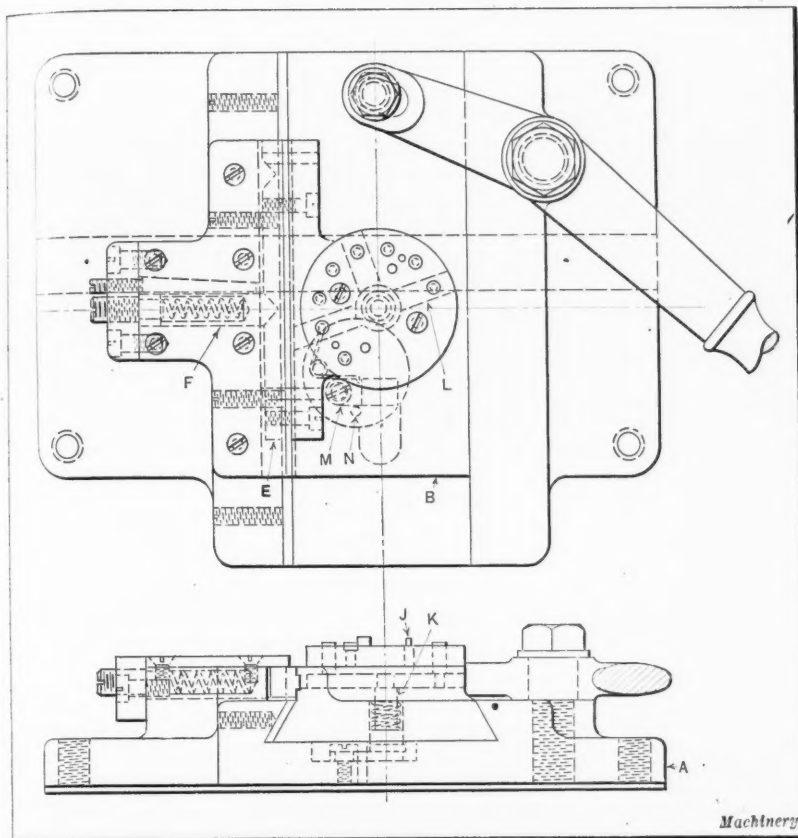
Two-position Fixture used on Multiple Tapping Machine
